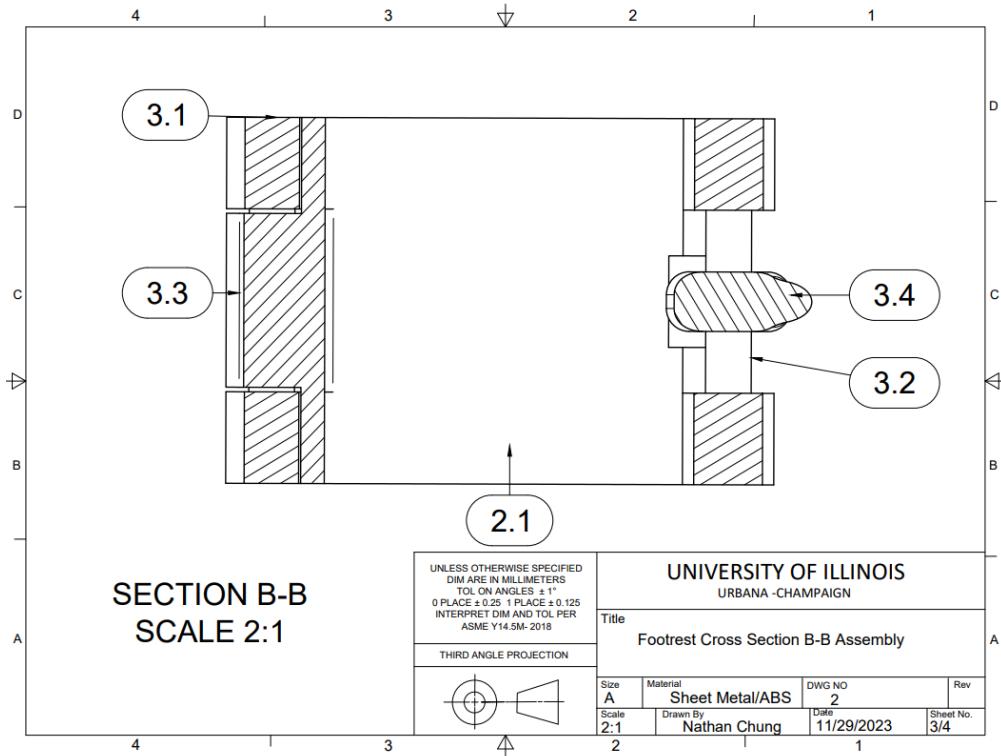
Footrest Cross Section Assembly Section B-B View Drawing
